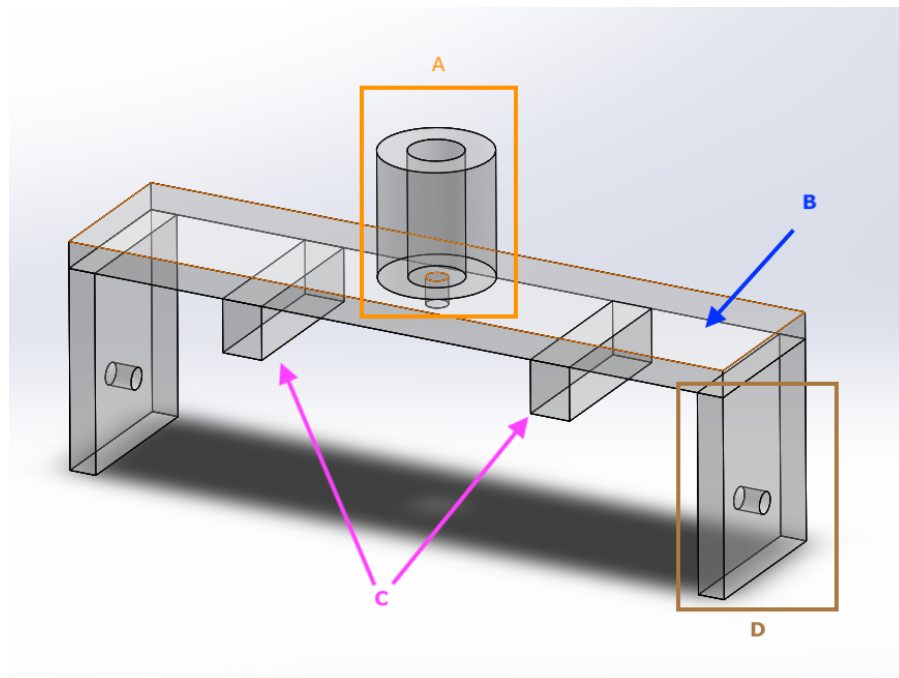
The piezoelectric actuator support has been realized in polycarbonate and its parts have been chemically bonded. This is the design concept. Part A hosts the actuator in its hole, with a H6 tolerance to ensure the lowest clearance. Part B represents the main dimension of the support, which is placed along the x-axis of the lab frame; in order to guarantee the highest inertia for harmonic displacement solicitations, the thickness of this part has been over-sized. Parts C were designed to lean on the magnet upper case face and to leave room for the cap holder and the upper part of the test tubes. Parts D presents screwed wholes to host flat-headed screws to tighten the support to the device. The real, modified, design presents additions to Parts C, two lateral joints and a screw in Part A for avoiding possible backlashes.
